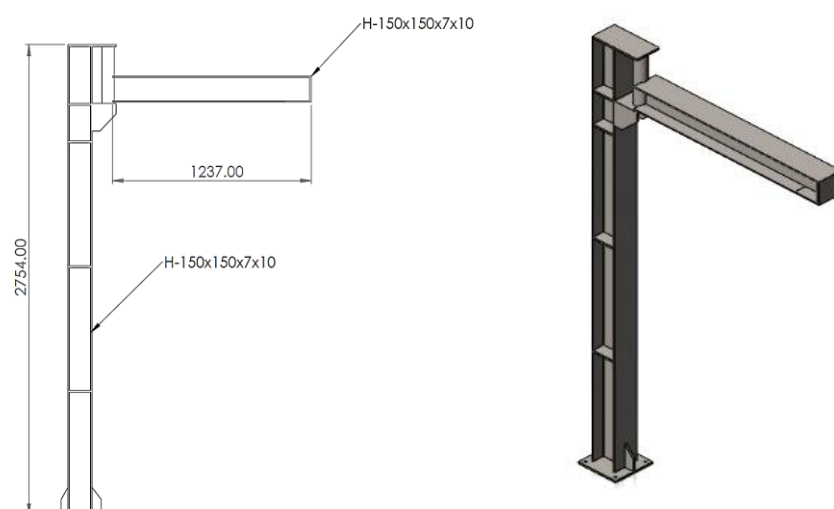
Type-2 Jib Crane; Swing arm beam H-beam 150×150×7×10 mm without a stiffener plate.
